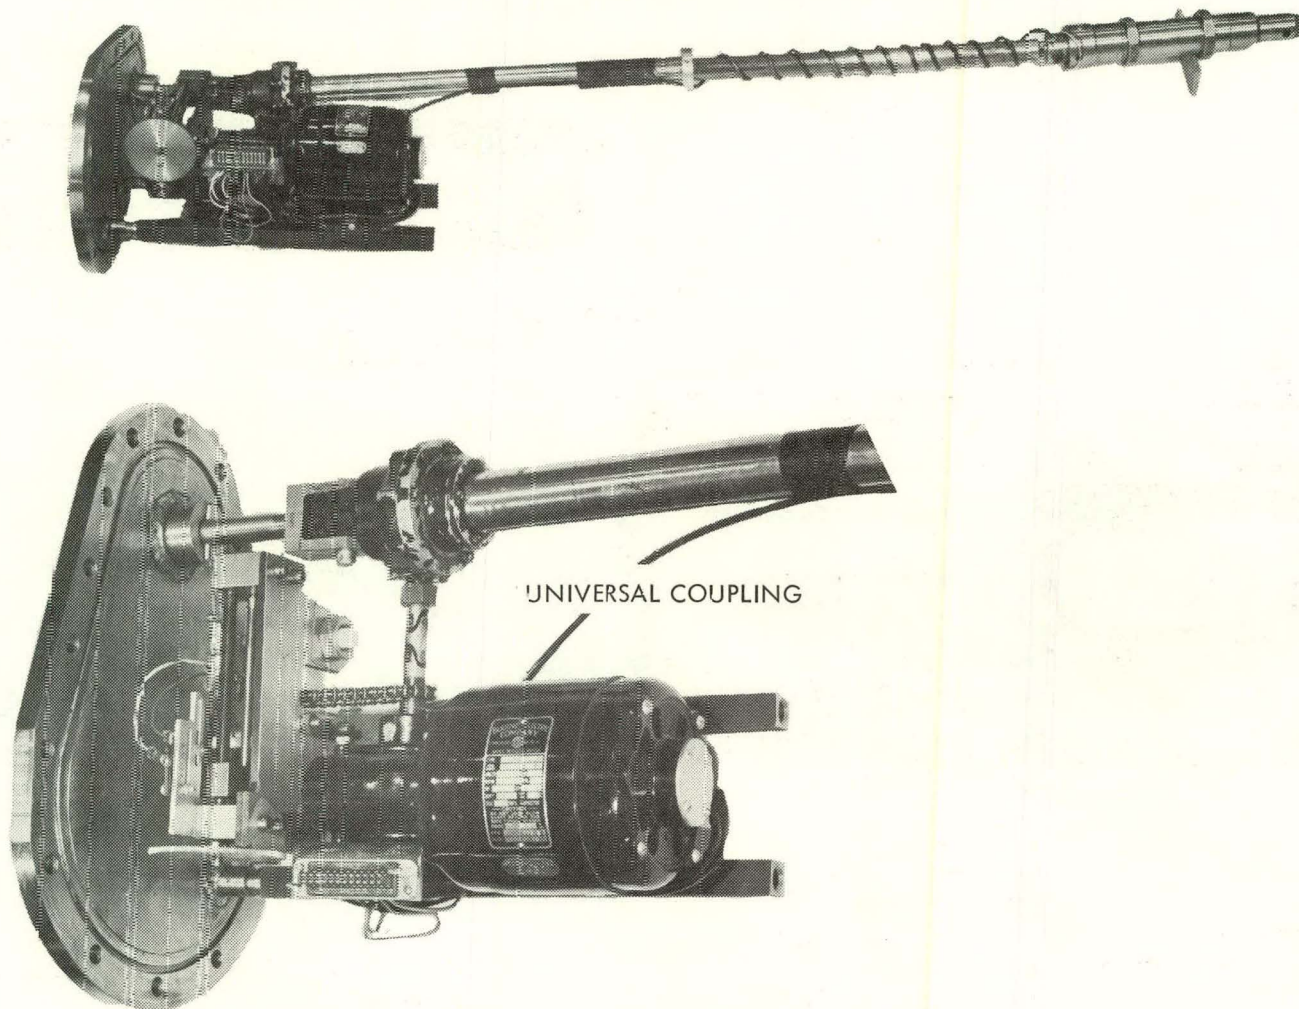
TYPICAL GCRE-I CONTROL ROD ACTUATOR ASSEMBLY
